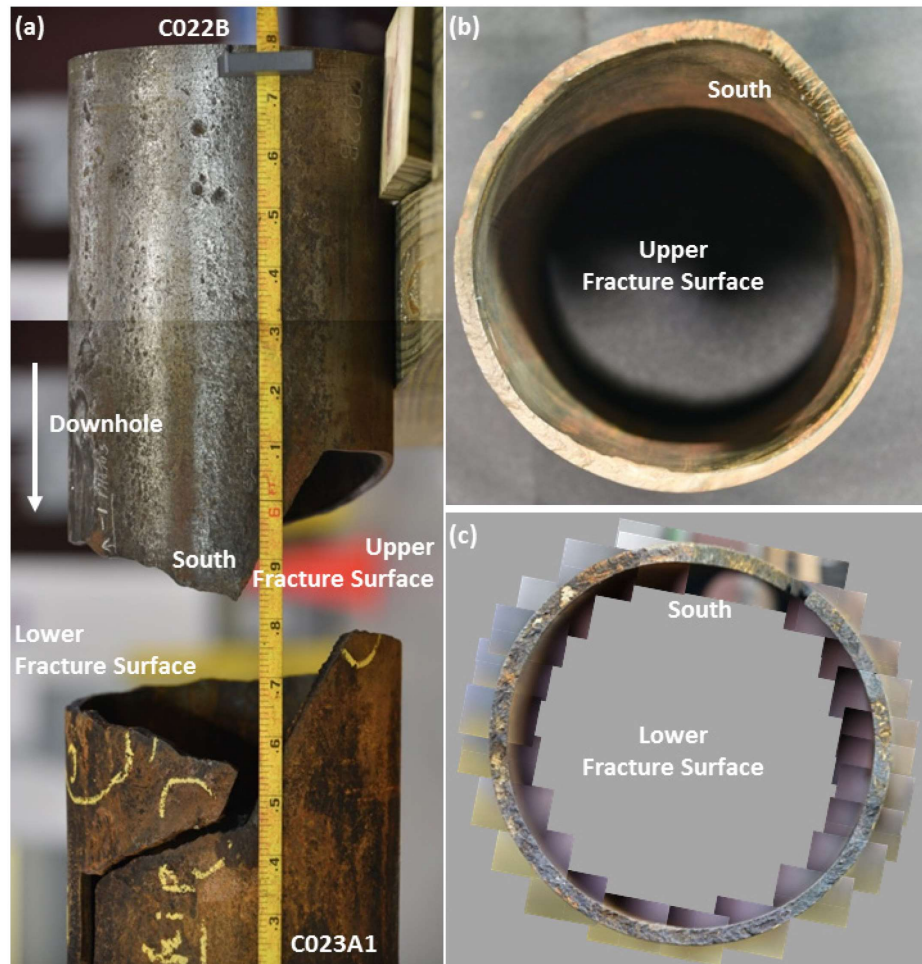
(a) Circumferential Parting Showing the (b) Upper and (c) Lower Fracture Surfaces
